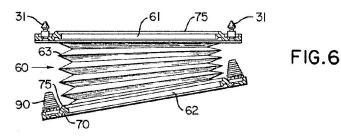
"...another type of accessory...to convert the camera into a view type camera."
